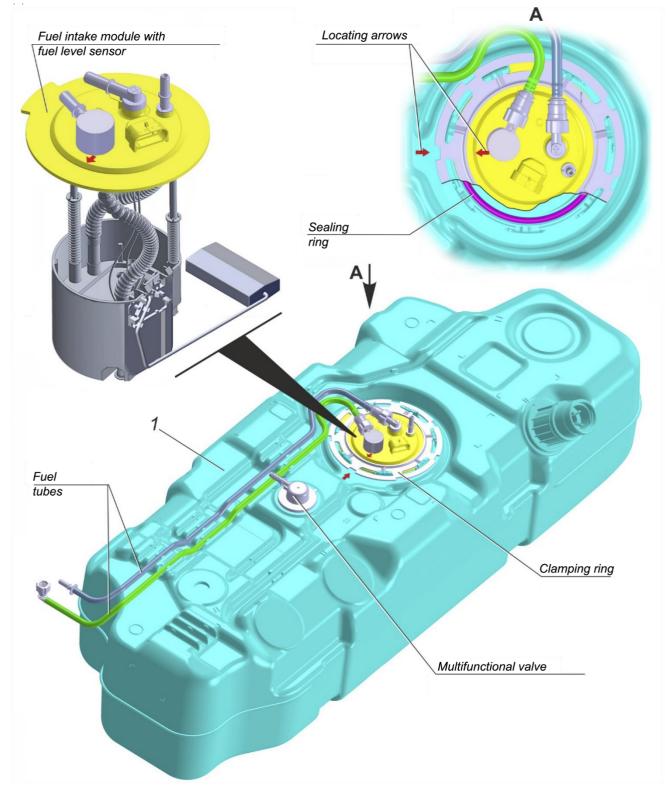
Flatbed vehicle fuel tank: 1 - fuel tank assembly
